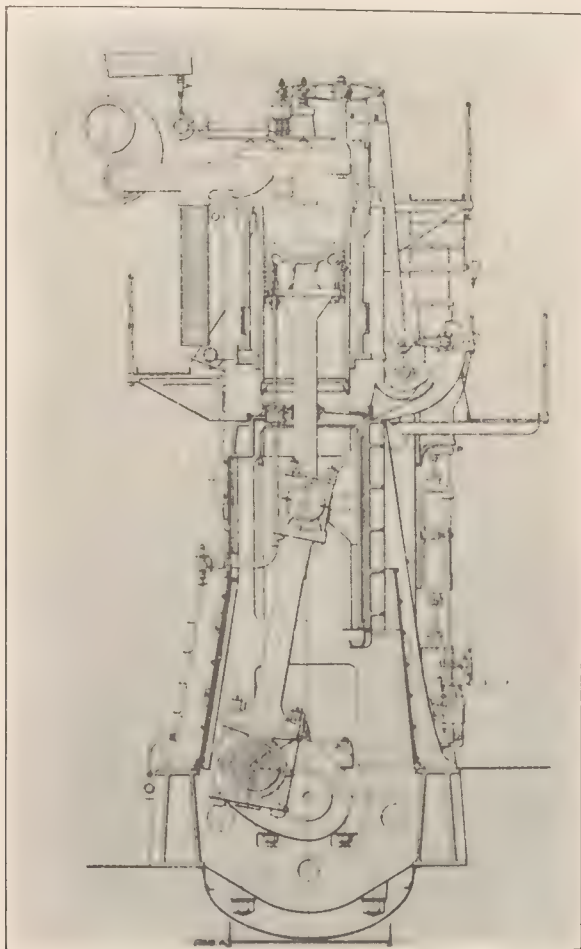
Diesel Engine of the "Fionia", Built by Burmeister & Wain, Copenhagen.
